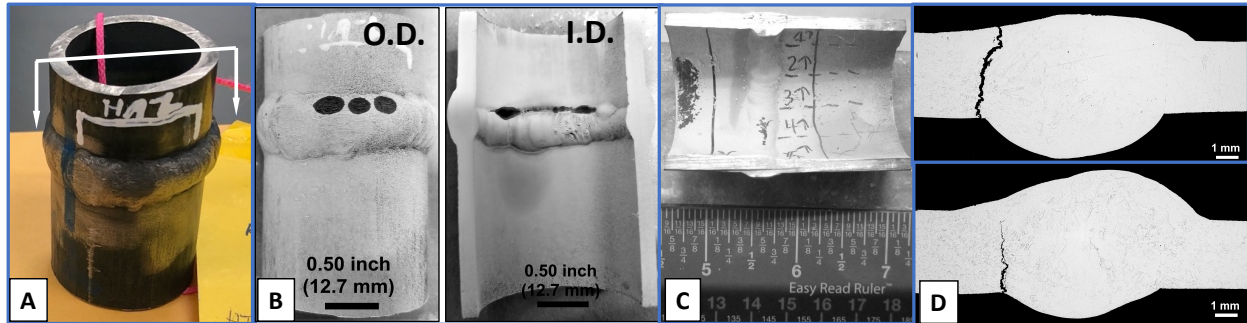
Tube failure investigation sectioning approach. (a) split tube lengthwise, (b) die penetrate inspection on OD and ID to identify extent of cracking, (c) removal around circumference of entire weld including areas with and without cracking, and (d) cross-sectional metallographic mounts.
